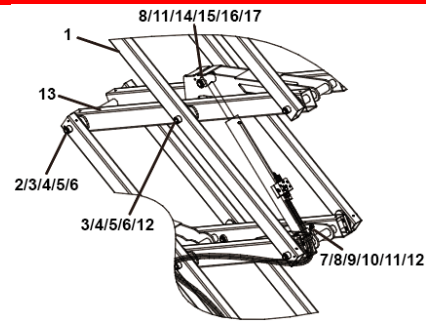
Assembling the fourth fork and upper cylinder (SR4069E)
